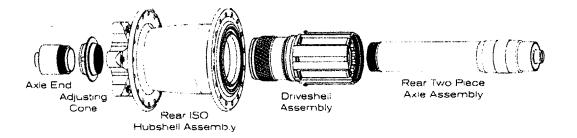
An exploded view of the Chris King RingDrive Freehub. Diagram courtesy of Chris King Precision Components.
